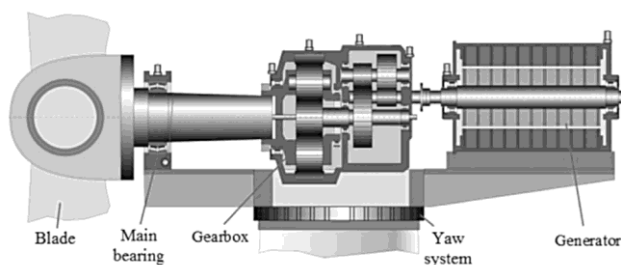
Structure of a wind turbine mechanical chain, including the blade, main bearing, gearbox, rotation control system, and generator [13]
